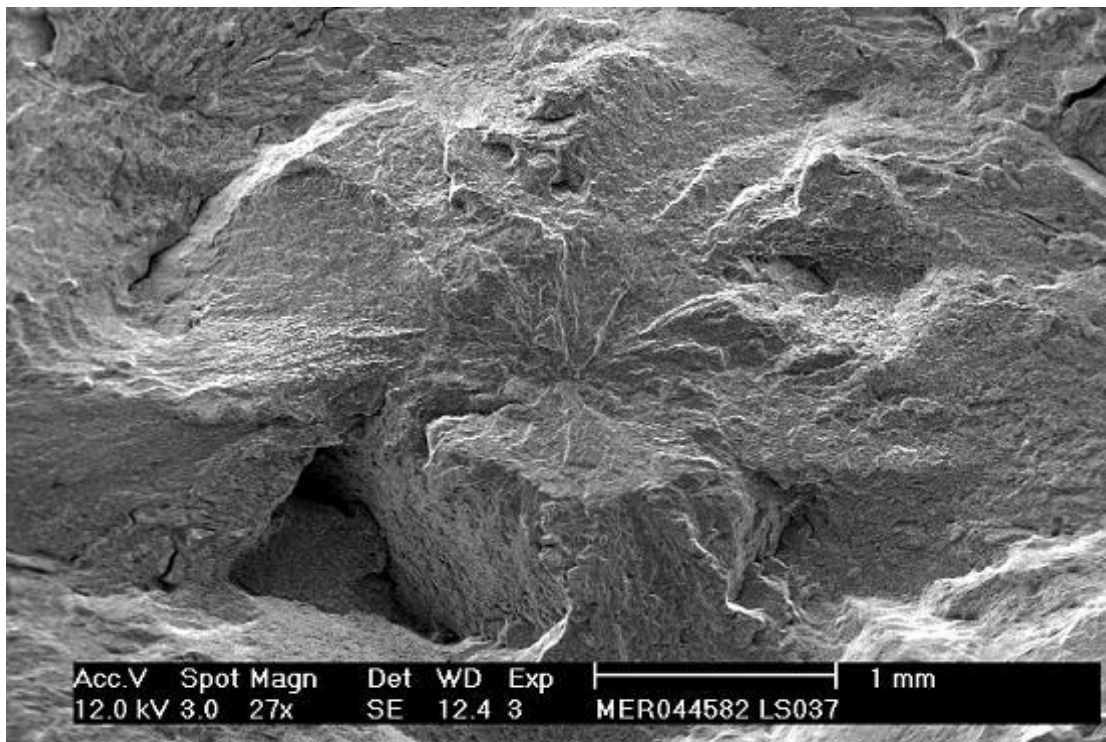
Sub-surface failure origin in cold dwell fatigue tested IPC5 disc test specimen [152]
